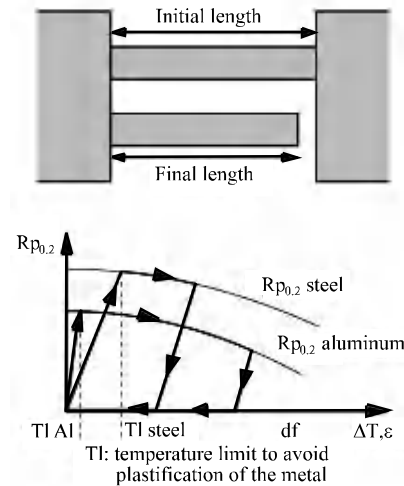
Stain/stress diagram during the welding of clamped parts
